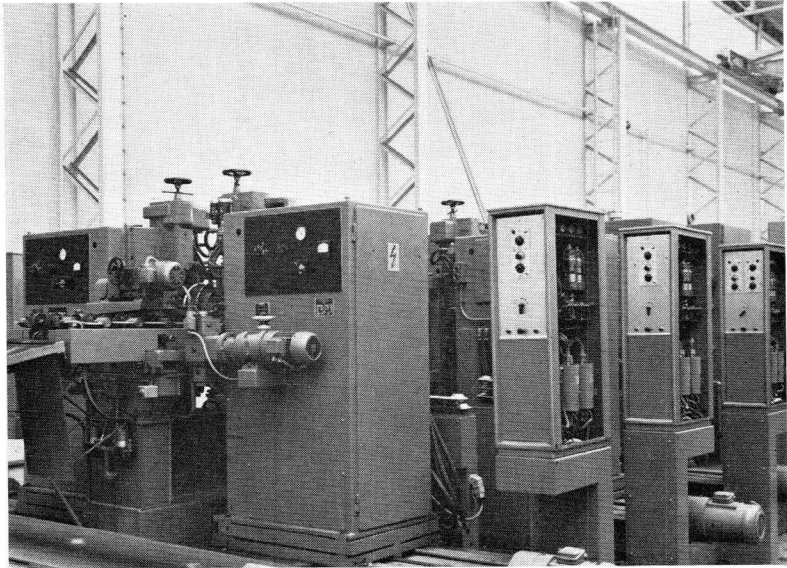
Car factory assembly line showing ignitron-controlled welding equipment (above centre).
